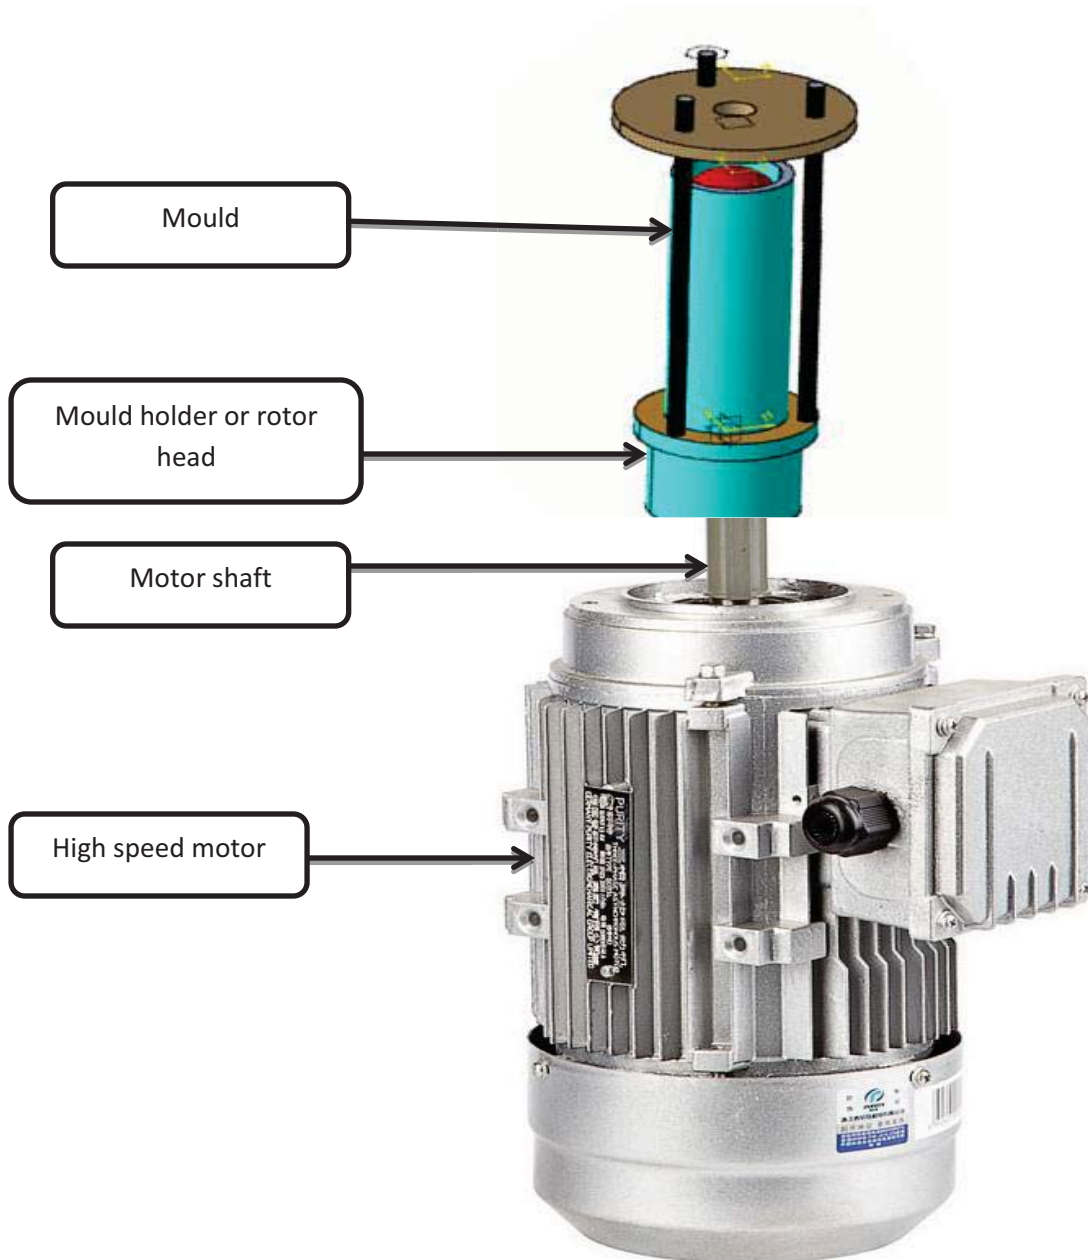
Experimental set up for centrifugal casting of ceramic slurry.
